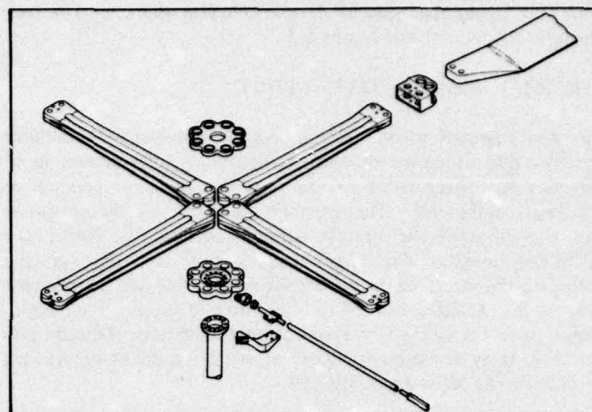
Exploded assembly of Bearingless Main Rotor concept.
